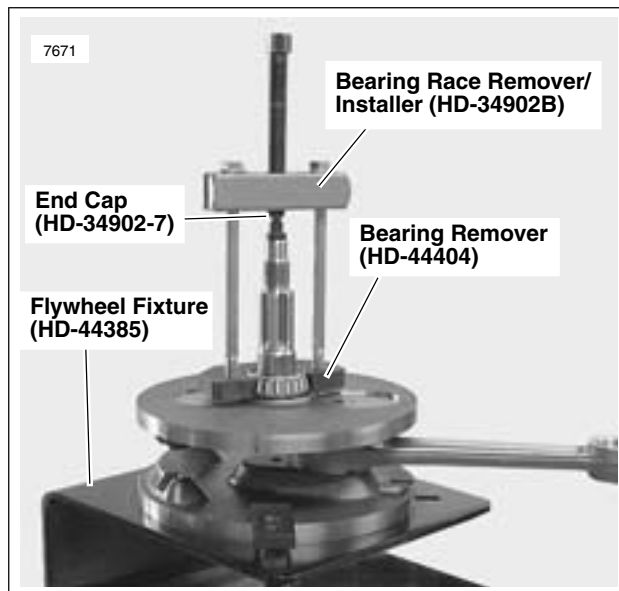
Removing Sprocket Shaft Roller Bearing
